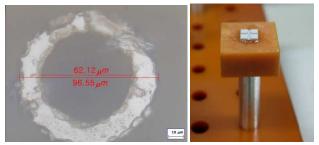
End of glass nozzle (left) and printing module after assembly (right)
